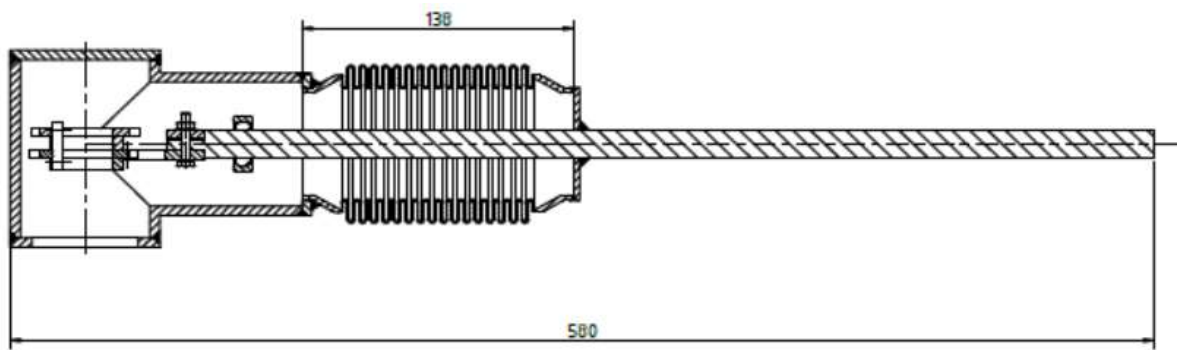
Ratchet gear mechanism drawing of ball valve DN 100
